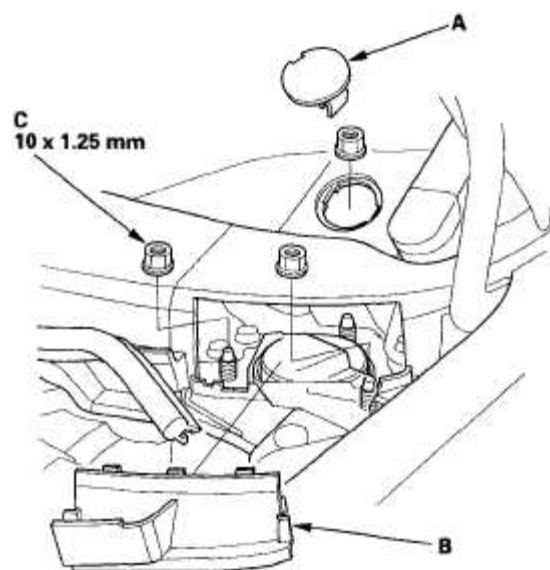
Identifying Damper Pinch Bolts And Self-Locking Nuts
